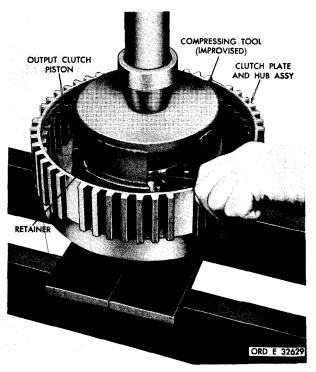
Removing (or installing) retaining ring for piston return spring retainer
